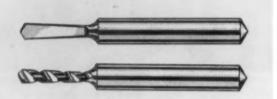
Two types of pivot drills for producing small, close-tolerance holes. Above is a flat spade drill and below, a spiral fluted drill.
